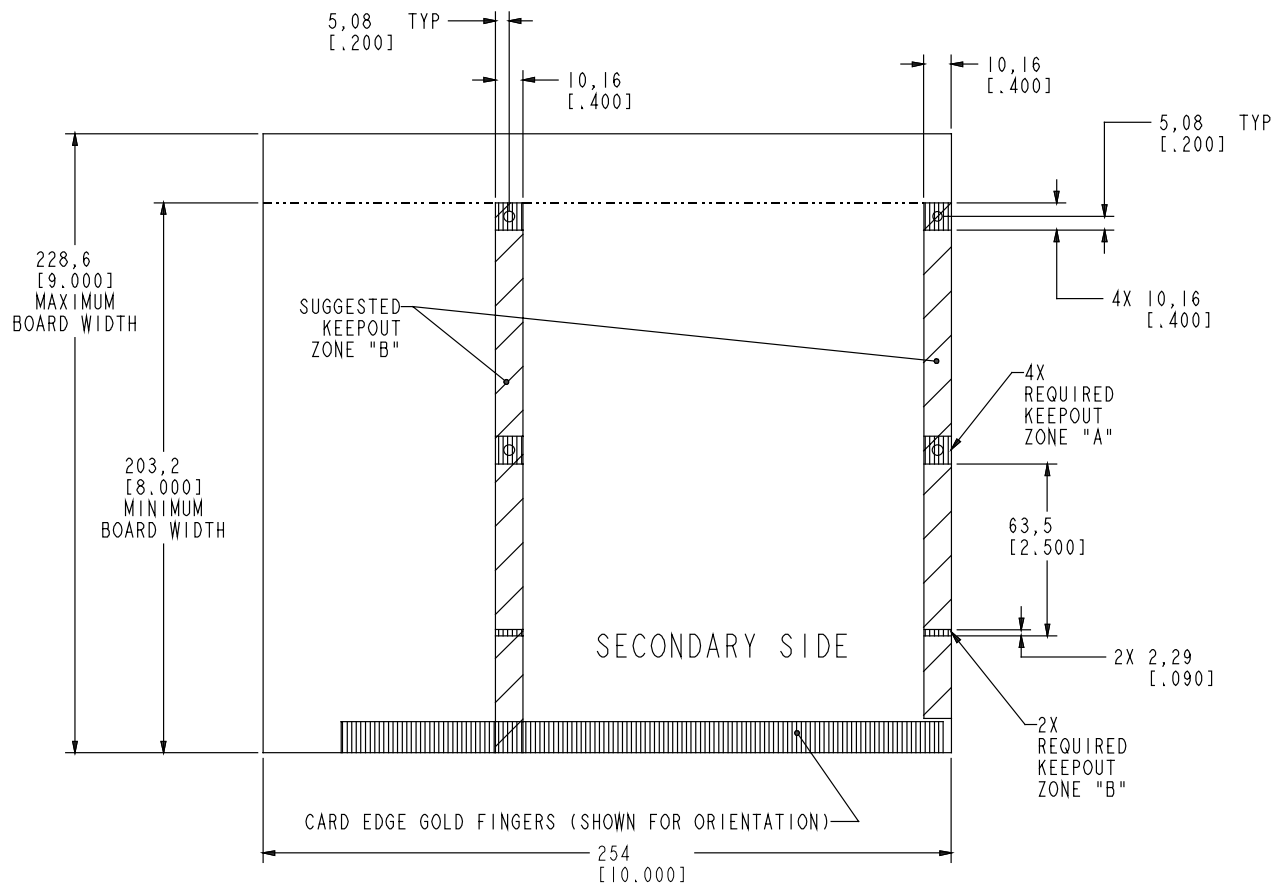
NLX Motherboard Dimensions—10.0" Secondary Side
